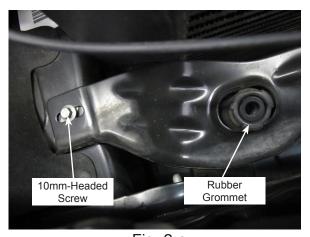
c (Upper cooler support bracket. P. Side shown)
